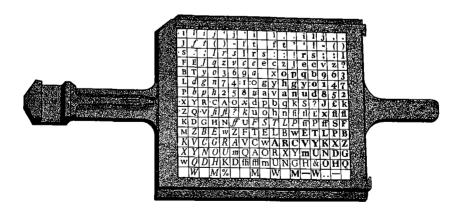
Part of the Monotype caster. Each key on the keyboard which represents a letter causes two holes to be punched in a spool of paper. When the spool is run through the caster, compressed air passing through one of these holes causes a stop-pin in an air pin block to rise.
